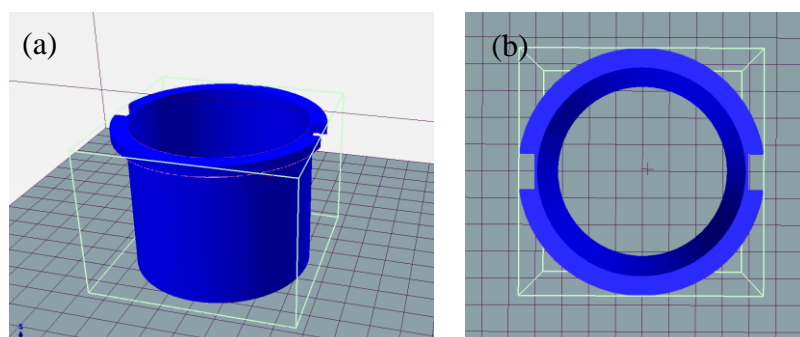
3D model of container fitting in (a) isometric view and (b) top view
